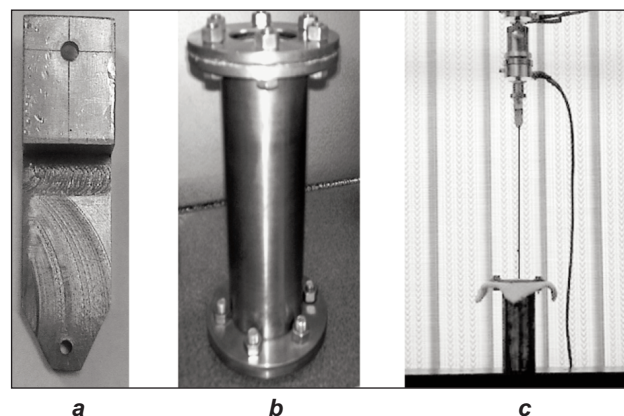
a – special tools installed on fixed jaw; b – sample holder on movable jaw; c – general view of proposed method
